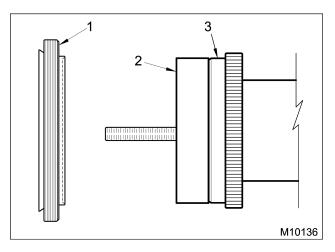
Installation of Crankshaft rear oil seal and wear sleeve assembly
